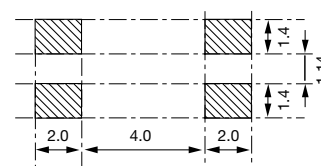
CSM-8B – Recommended Solder Pad Layout Top view
